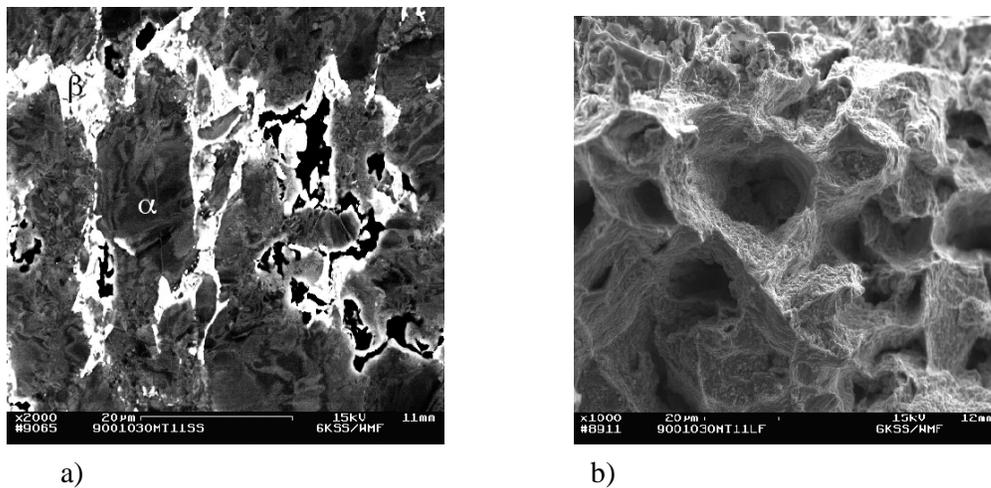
a) Deformation with substructure formation in α and cracks along α/β boundaries and fracture in β , b) fracture surface of a) with grain/phase boundary failure through β in Ti6242 of DB cross weld micro-tensile specimen tested at 700°C (20 μm marker).
